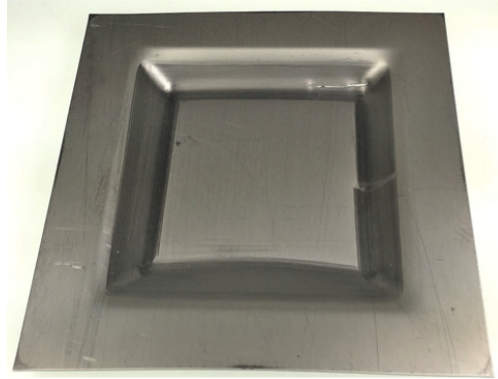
The uncompleted MT shape manufactured up to the point where fractures occurred.
